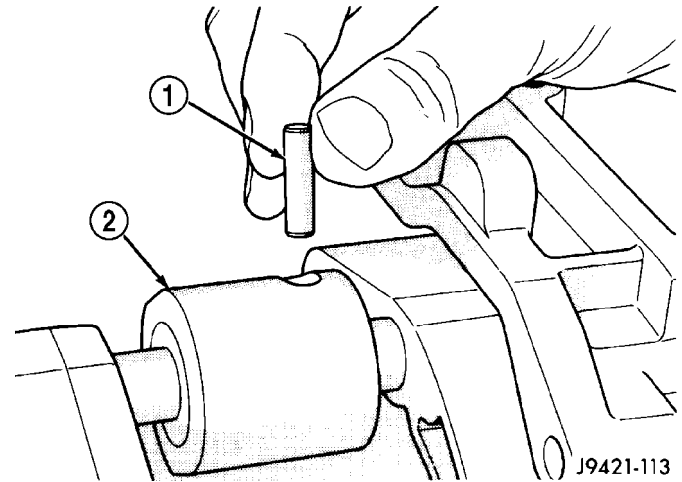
STARTING ROLL PIN IN SHIFT SHAFT LEVER
